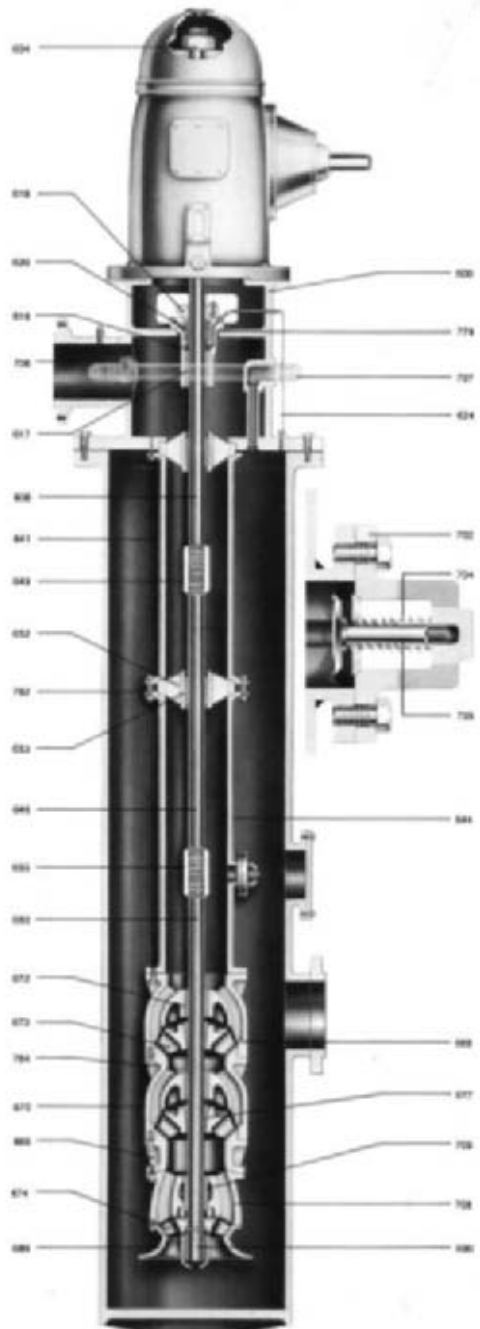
Self-priming vertical deep-well cargo pump (ITT/Gould Pumps, Inc.)
